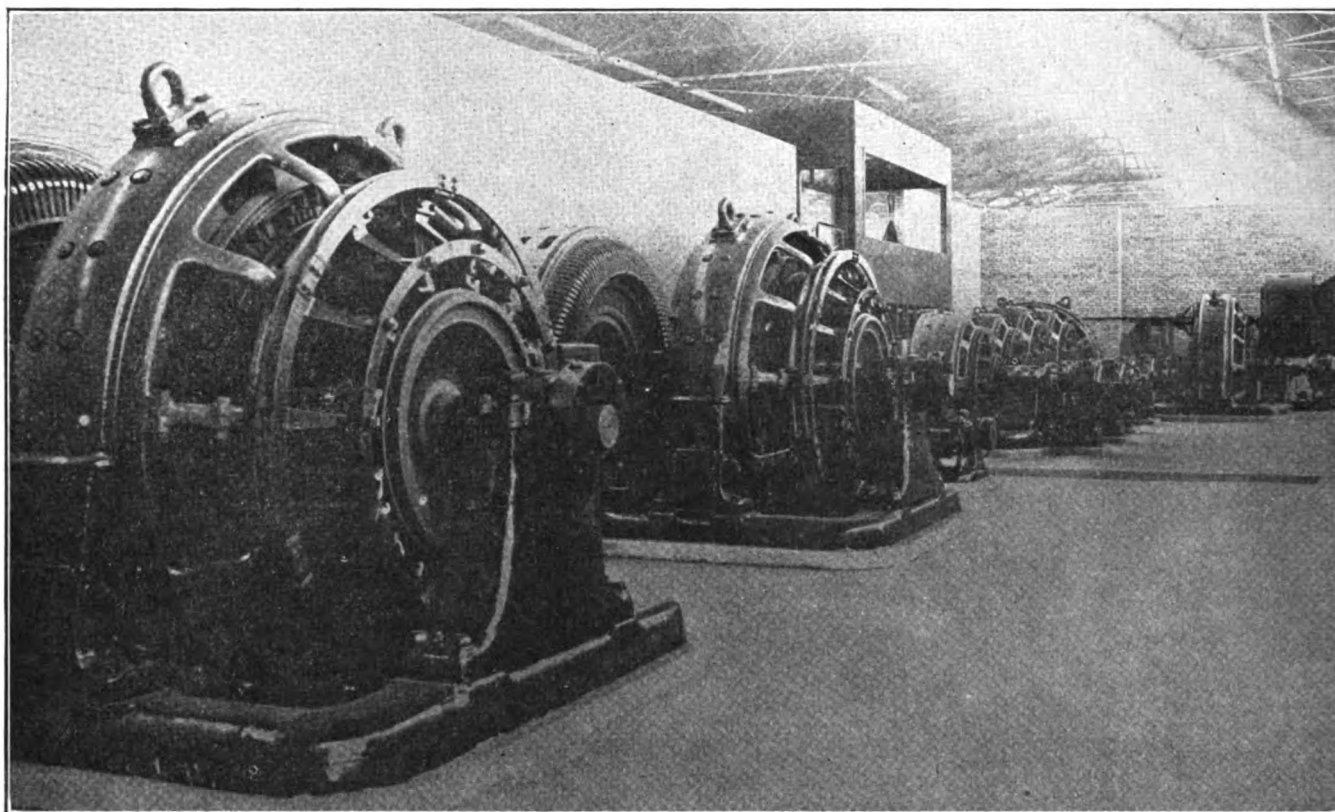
Motor drive of new electrically driven hot strip mill, furnished by the General Electric Company at Trumbull Steel Company. The large machines in the foreground are motor generator sets. The mill drive is the group of machines in the background.
